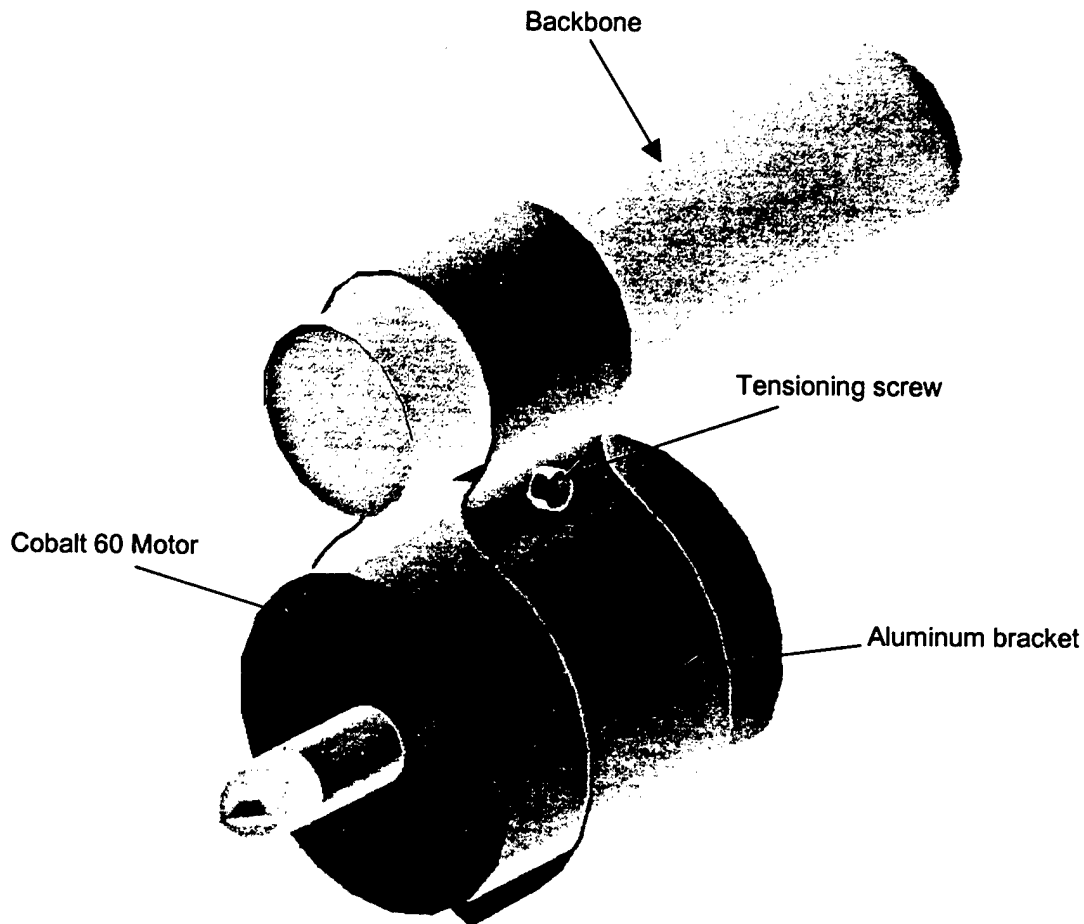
Engine Motor mount attaching a Cobalt 60 with the backbone by an aluminum bracket (plastic restraint not depicted for clarity. Refer to drawing package)
